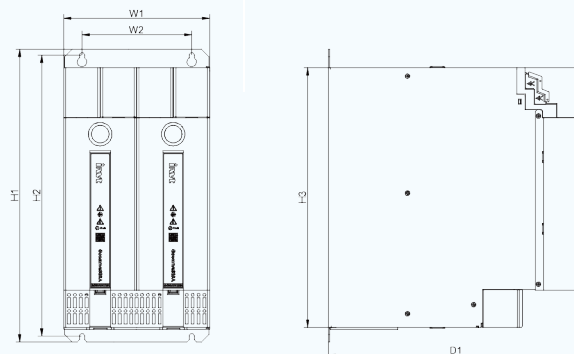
Wall mounting drawing for the 380V 45–75kW inverter unit
